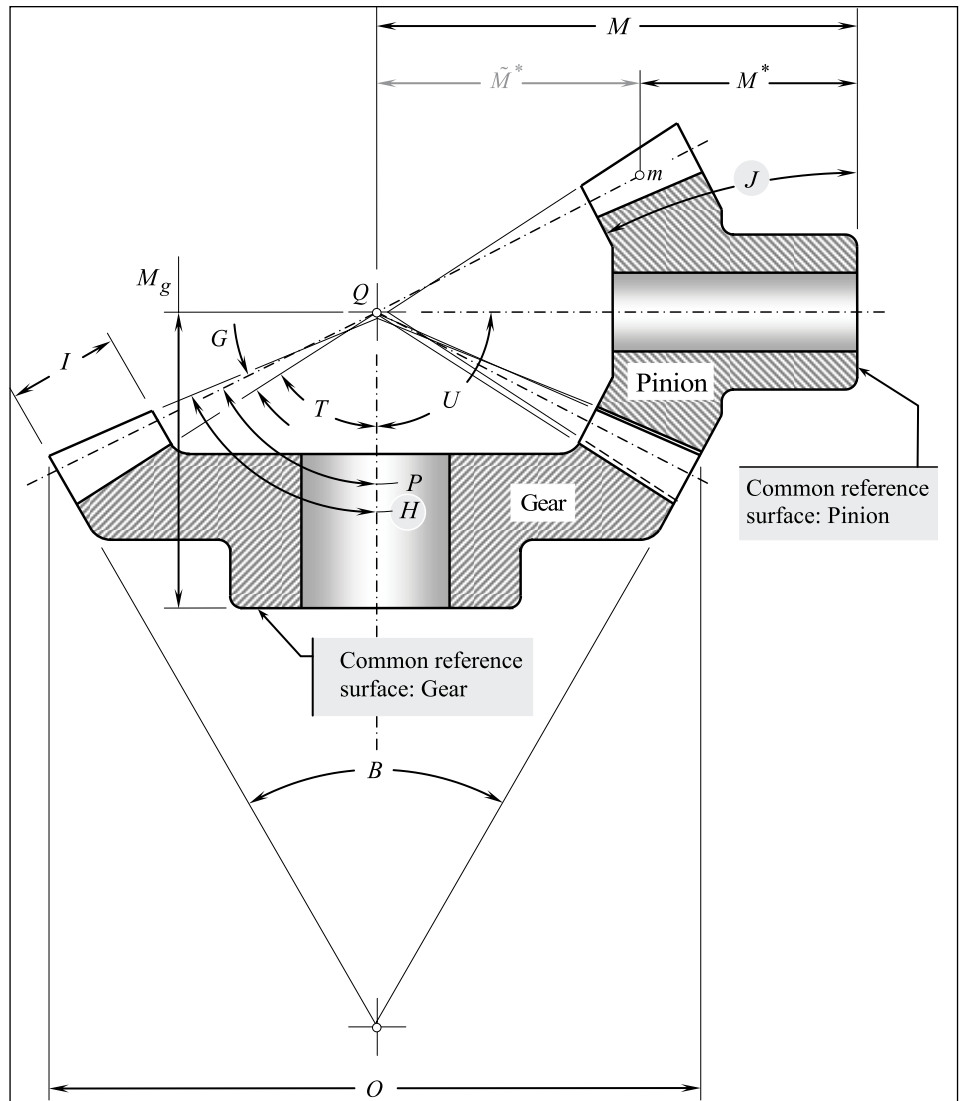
An alternative set of the geometrical dimensions for bevel and hypoid gearings.
